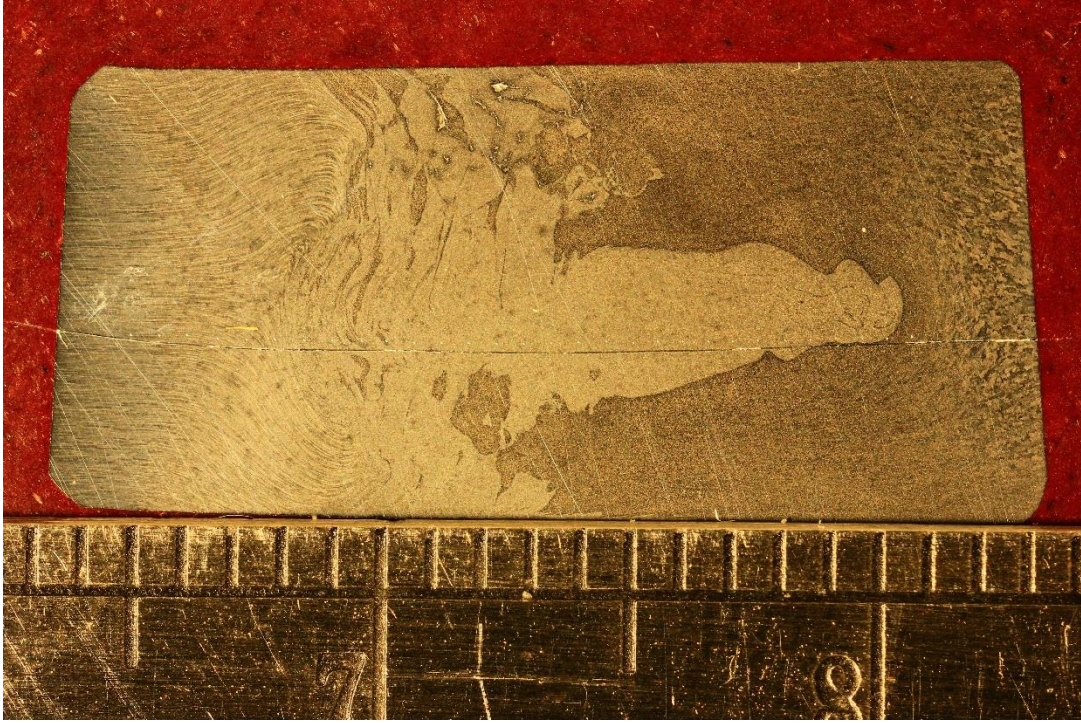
Macrograph of Weld 5 Sample 9
